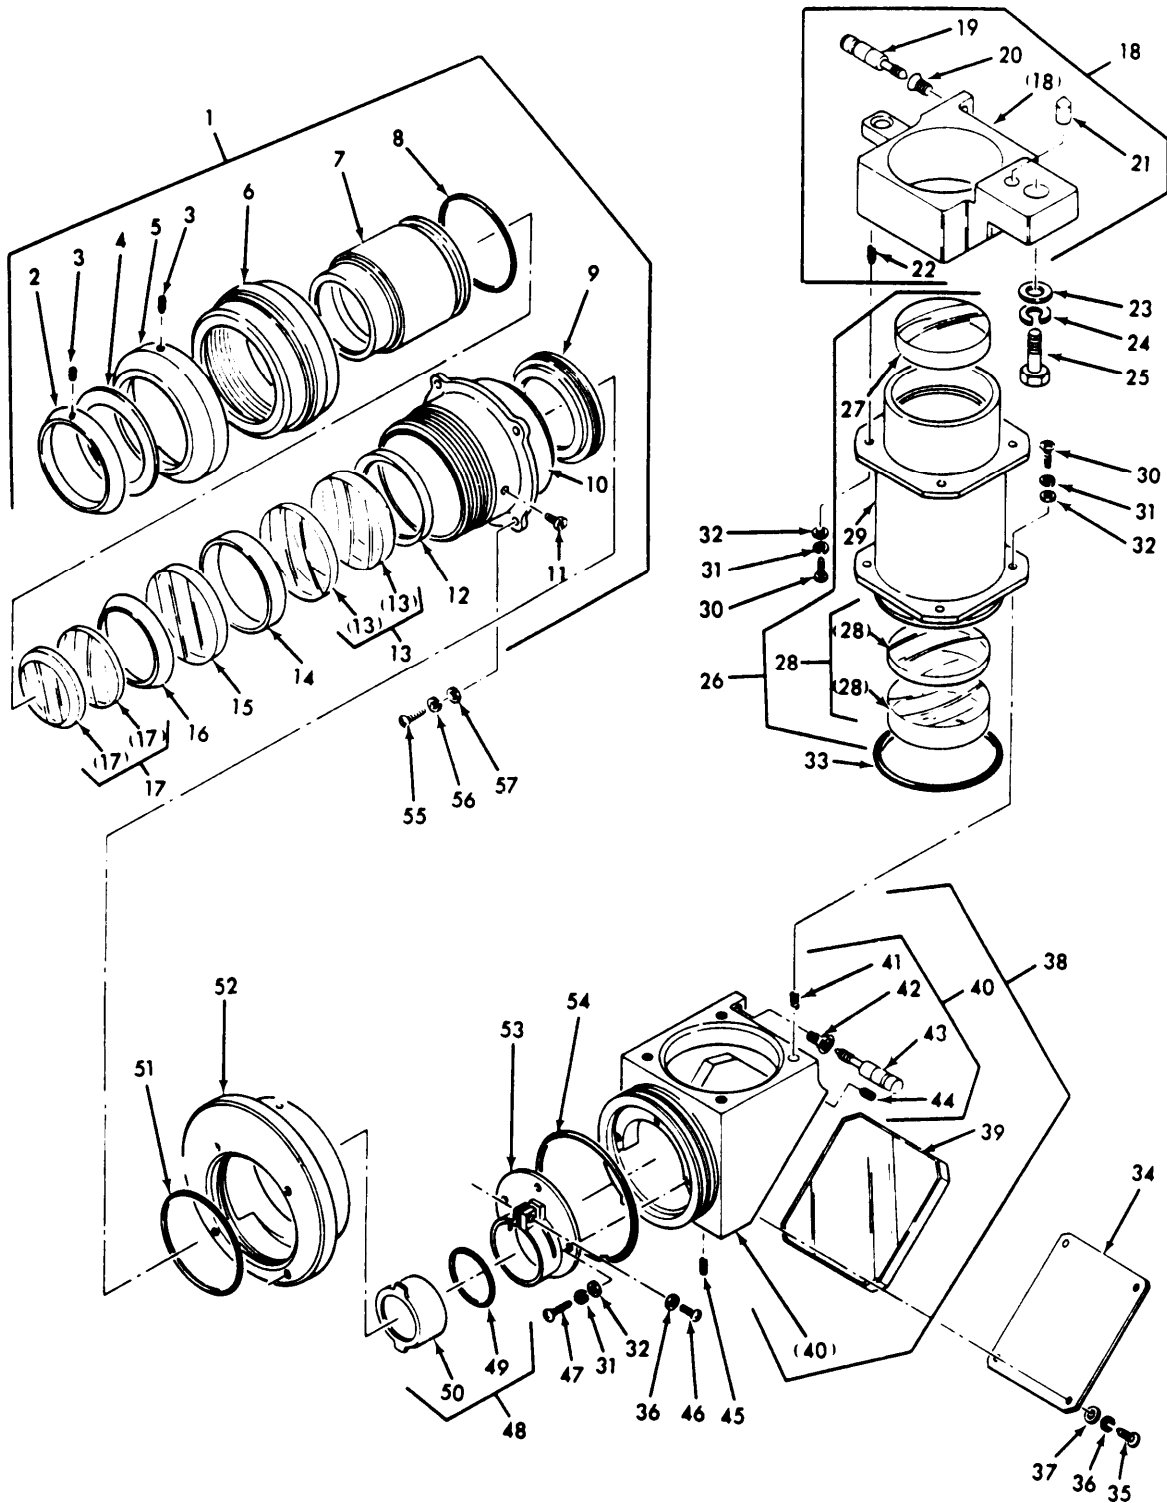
LED VIEWER ASSEMBLY COMPONENT PARTS (ASSY P/N SM-D805768), EYEPIECE ASSEMBLY, RETICLE ASSEMBLY, HOUSING MOUNT, HOUSING ASSEMBLY, MIRROR ASSEMBLY, AND HOUSING.
